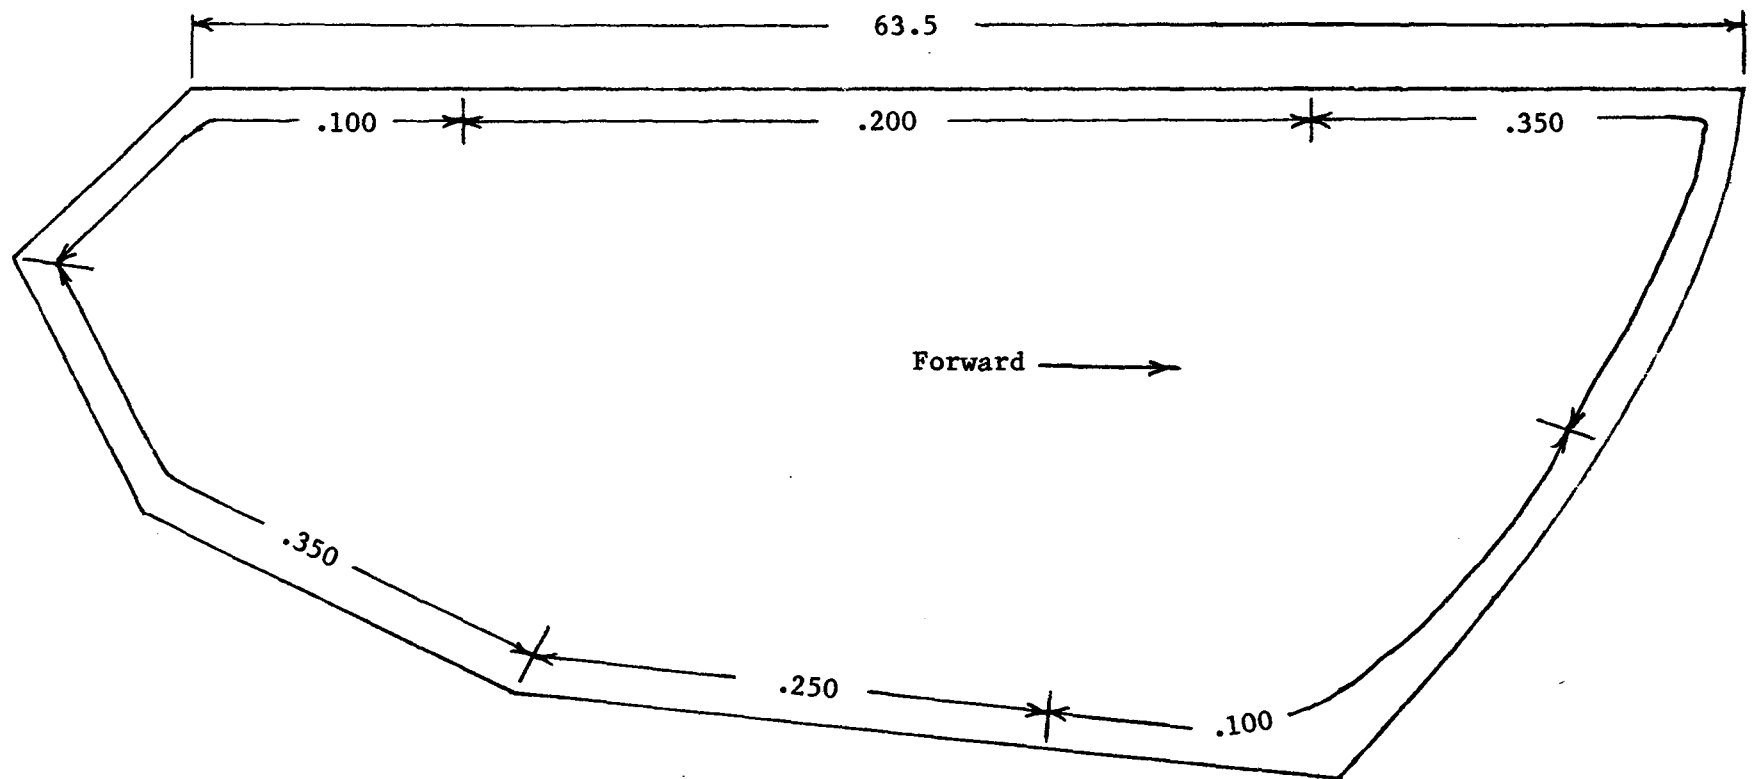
Explosive cord to acrylic separation distances for Test 3.
